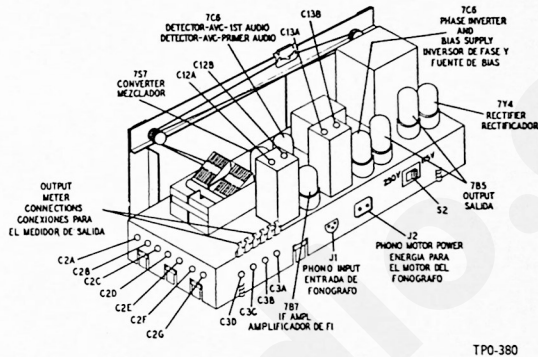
Top View of Chassis, Showing Trimmer Locations
